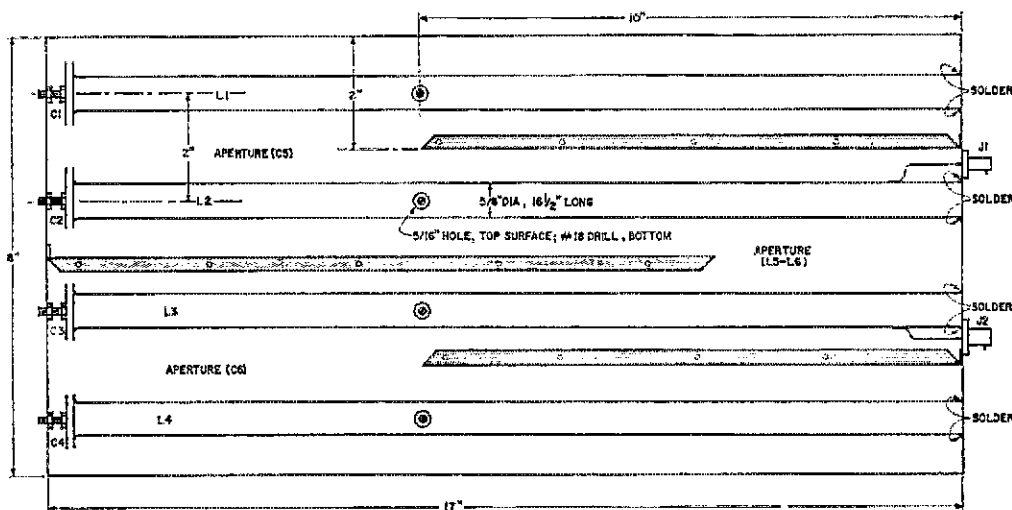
Principal details of the trap filter, designed for inclusion in an 8 by 17-inch chassis, or assembled from sheet metal as described. Assembly can be made longer, for lower-C tuned circuits and less critical tuning, if greater than standard chassis length is permissible.
